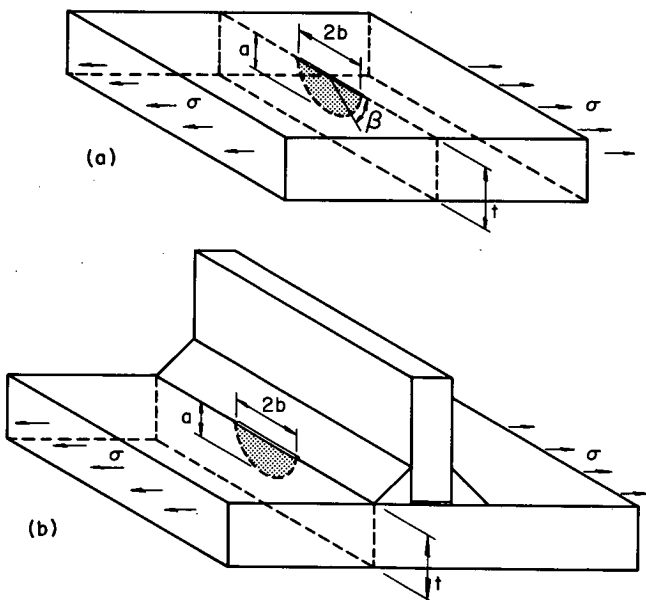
Part-through crack (a) in a flat plate and (b) at toe of a nonload-carrying fillet weld.
